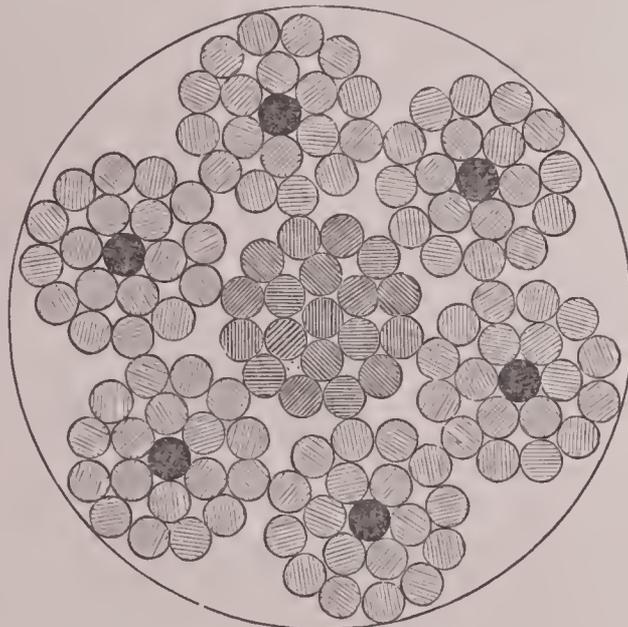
Cross-section of wire rope of 133 wires (full size).
